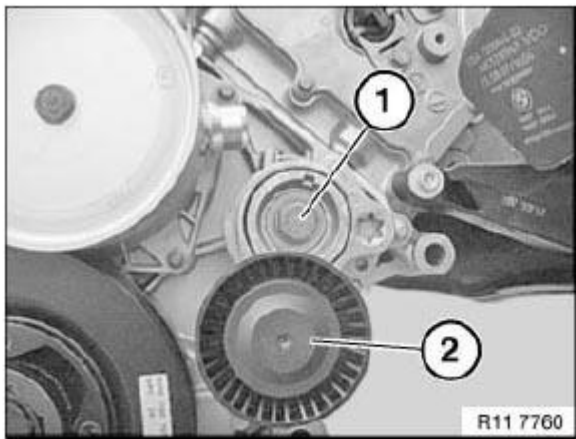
Identifying Belt Tensioner With Idler Pulley
